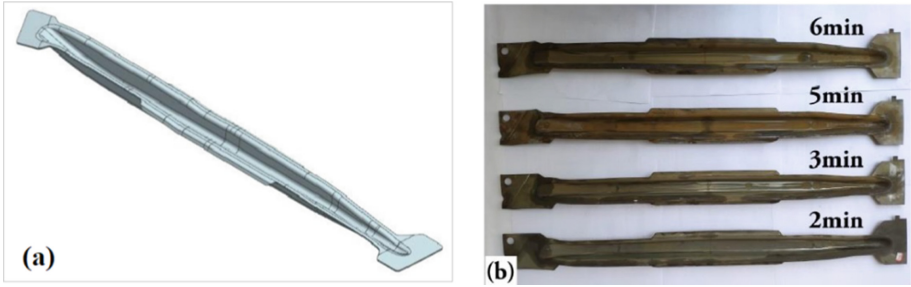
A 3D model of the part and the actual picture of forming: (a) 3D picture of the part; (b) actual photo of the hot stamping part.
